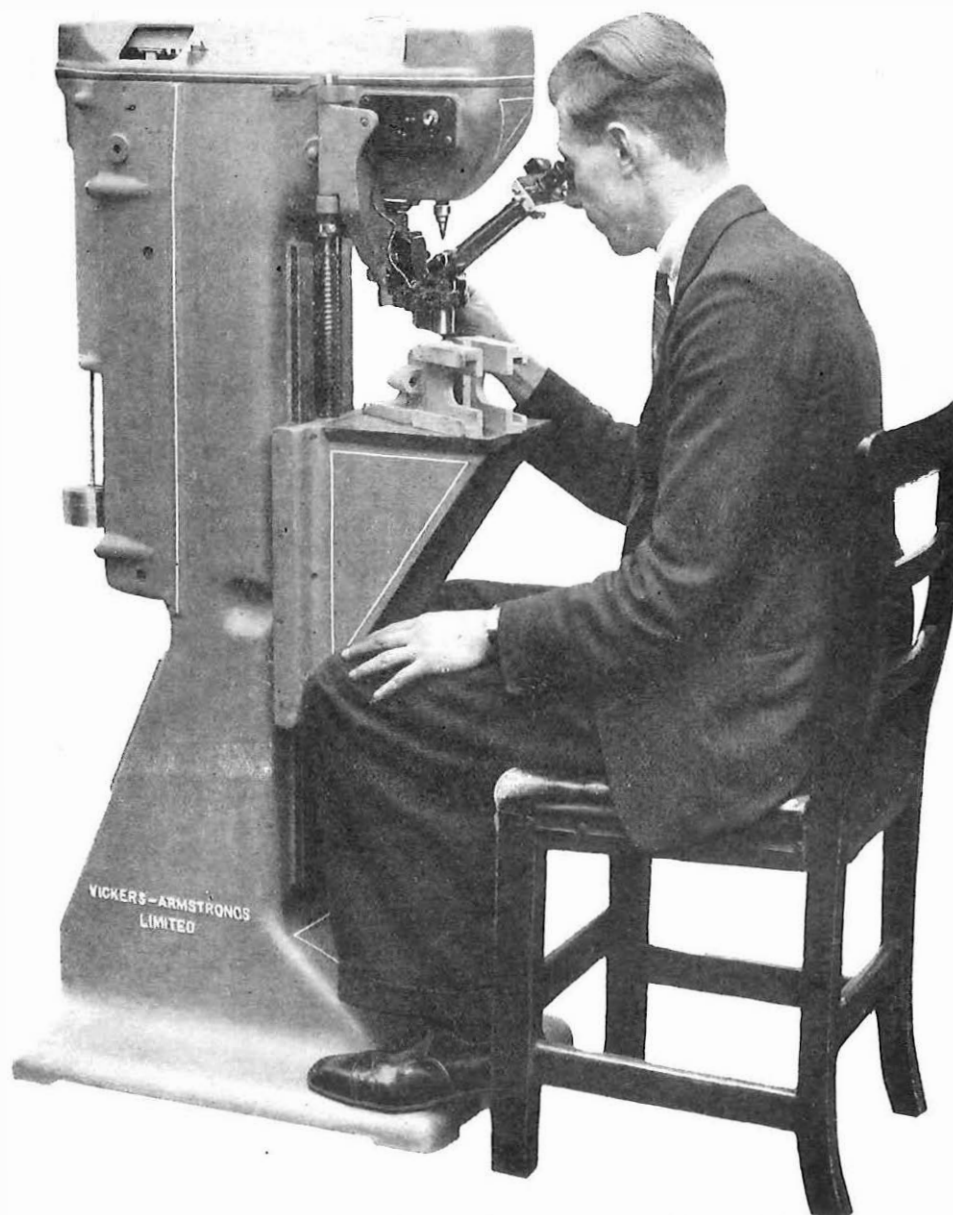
VICKERS PYRAMID HARDNESS TESTING MACHINE.
